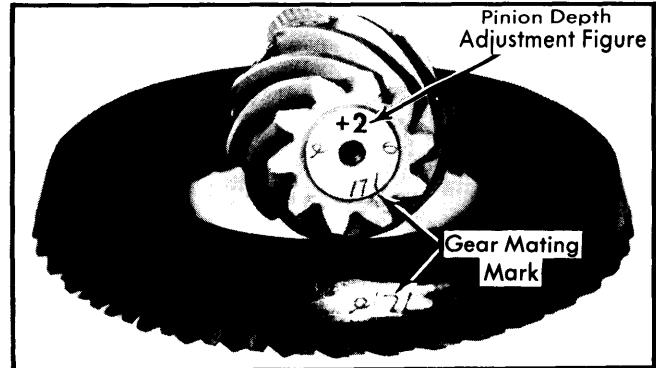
Pinion and Ring Gear Markings Showing Pinion Depth Adjustment Figure
